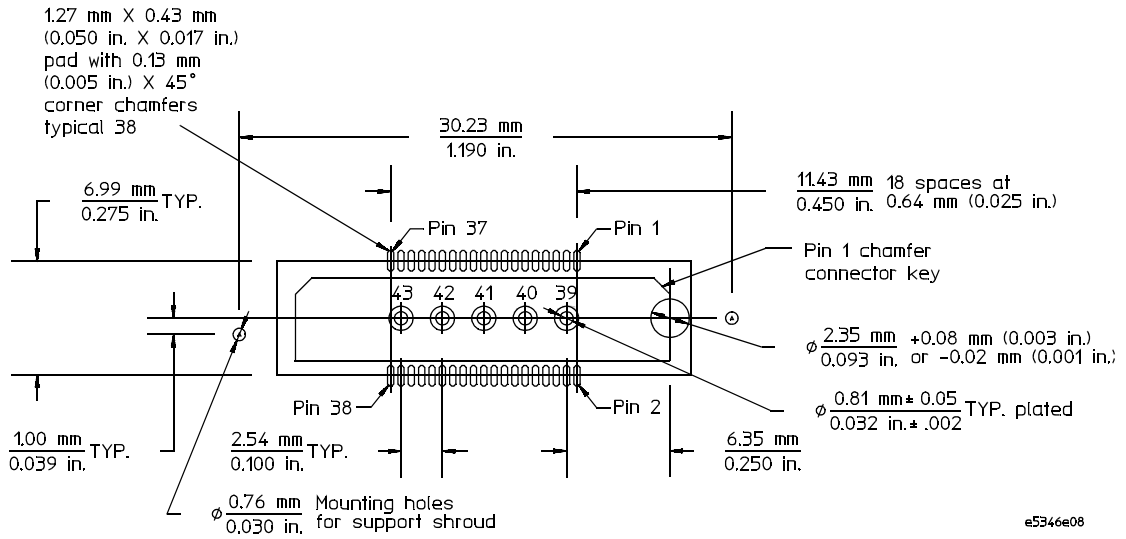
38-pin MICTOR connector footprint and support shroud mounting hole dimensions.
